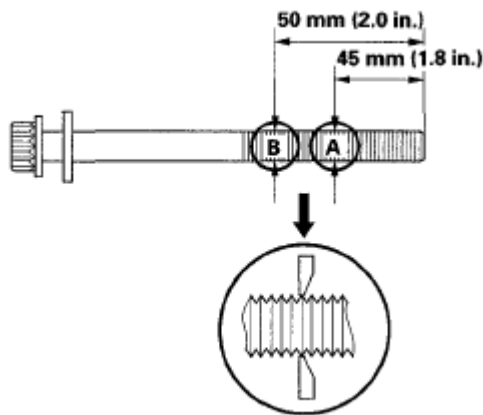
Measuring Diameter Of Cylinder Head Bolt At Point A And Point B
